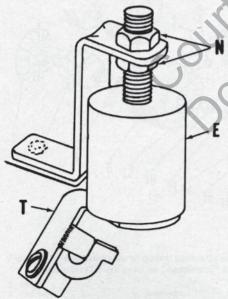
Loadmatic® Automatic Idle Control\* is adjusted by turning nuts (N) until bot-tom of electromagnet (E) is parallel with throttle arm (T). Do not bend throttle arm or electromagnet bracket.
